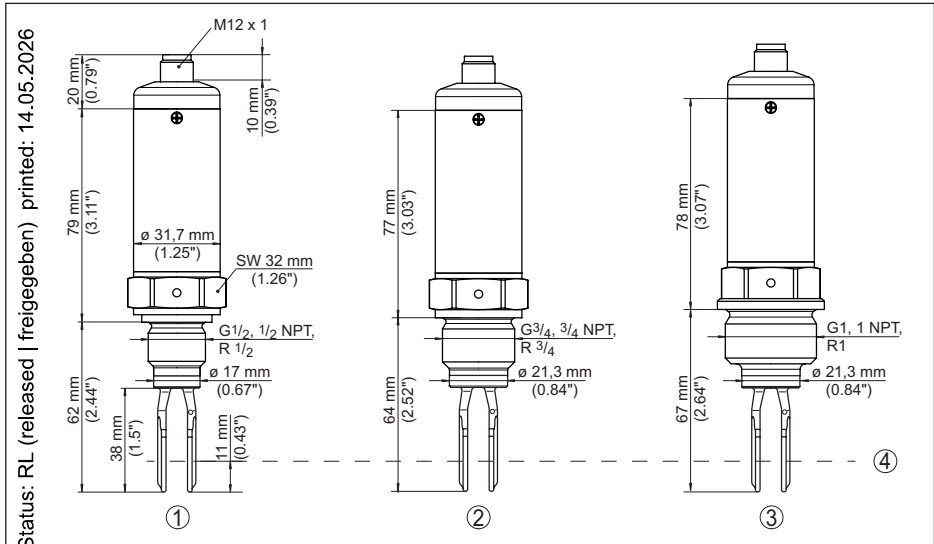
LEVEL SWITCH 8110, high temperature versions - threaded fittings
